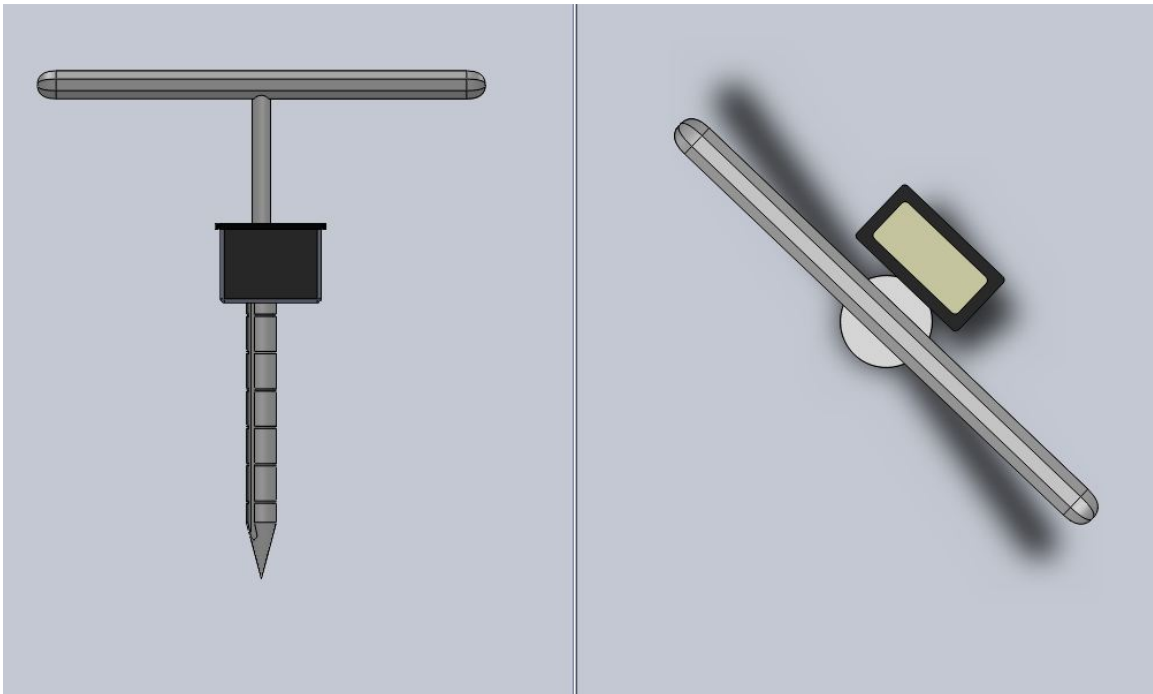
Final Design of the Soil Cone Penetrometer showing the display mounted
